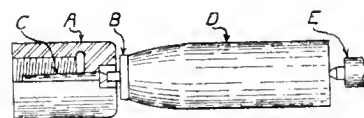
DRIVING CHECK FOR FINISH TURNING.
